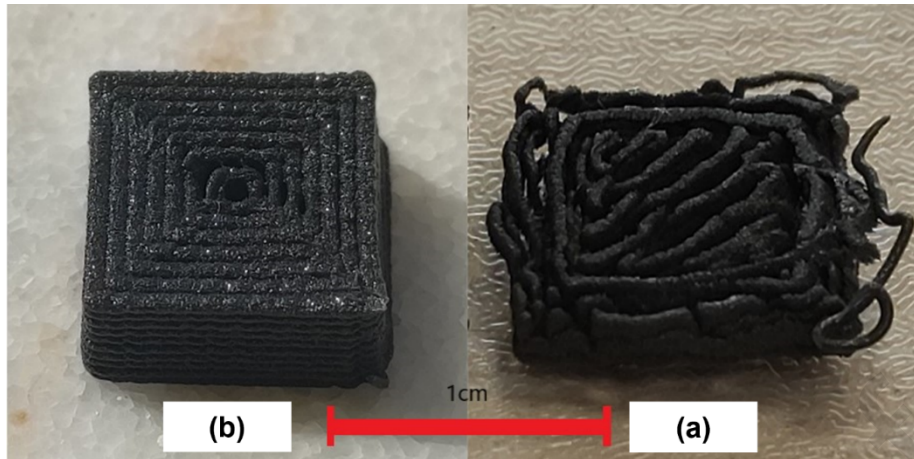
Pre-printed tests: a) cube sample printed on the magnet with initial temperature and b) cube sample printed on the mirror with magnets under the tray and optimized temperature.
